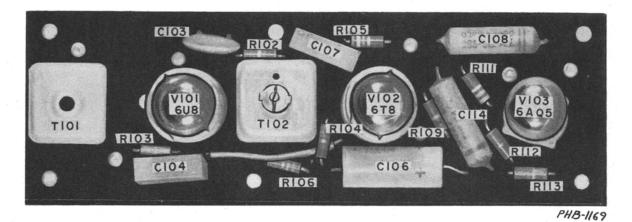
Sound I-F and Audio Printed Circuit Board-Component Side
